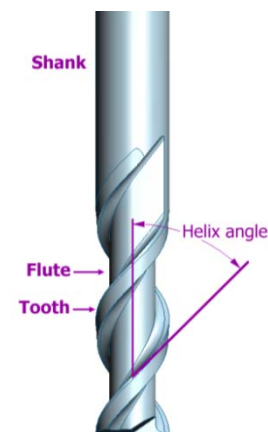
Illustration of a flat-end milling tool with shank and cutting section. The latter consists of helical flutes with cutting teeth at the ends. [picture obtained from: http://en.wikipedia.org/wiki/Milling_cutter]
